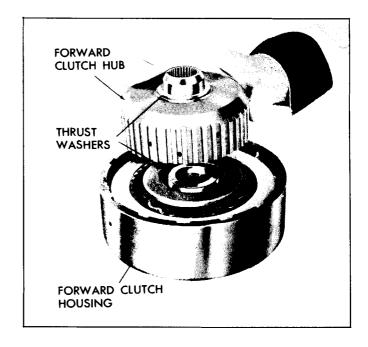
E-115 Removing or Installing Forward Clutch Hub
